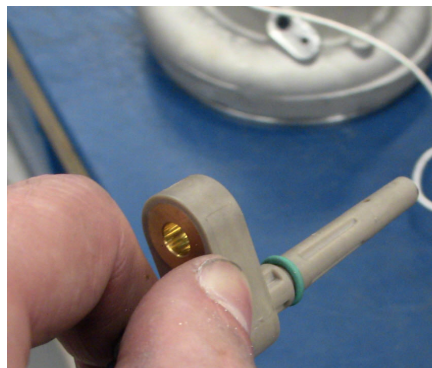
Lubricate O-Ring, Install, Check Depth, and Tighten Bolt
